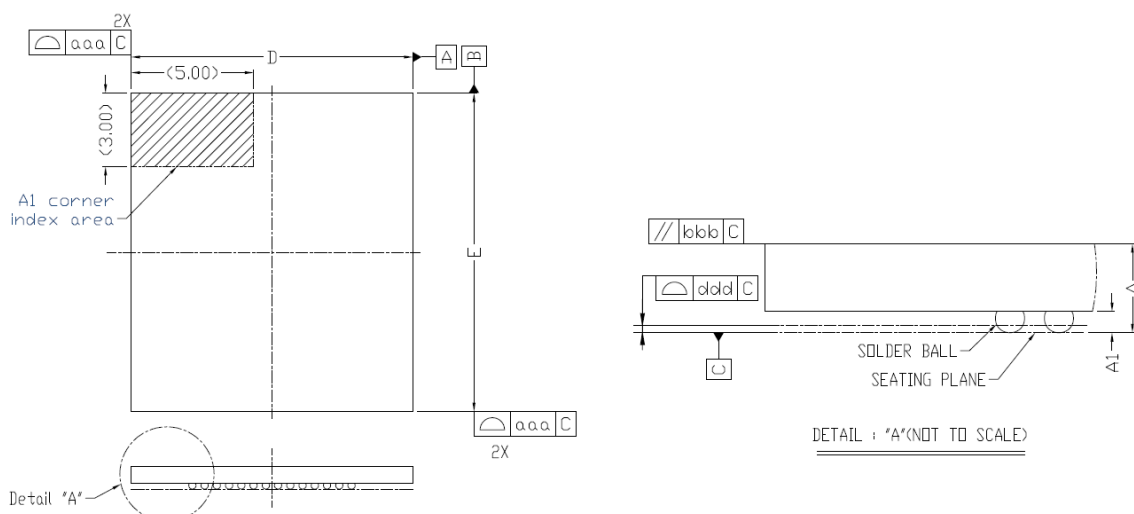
iNAND 8521 – Package Outline Drawing – Top and Side View
